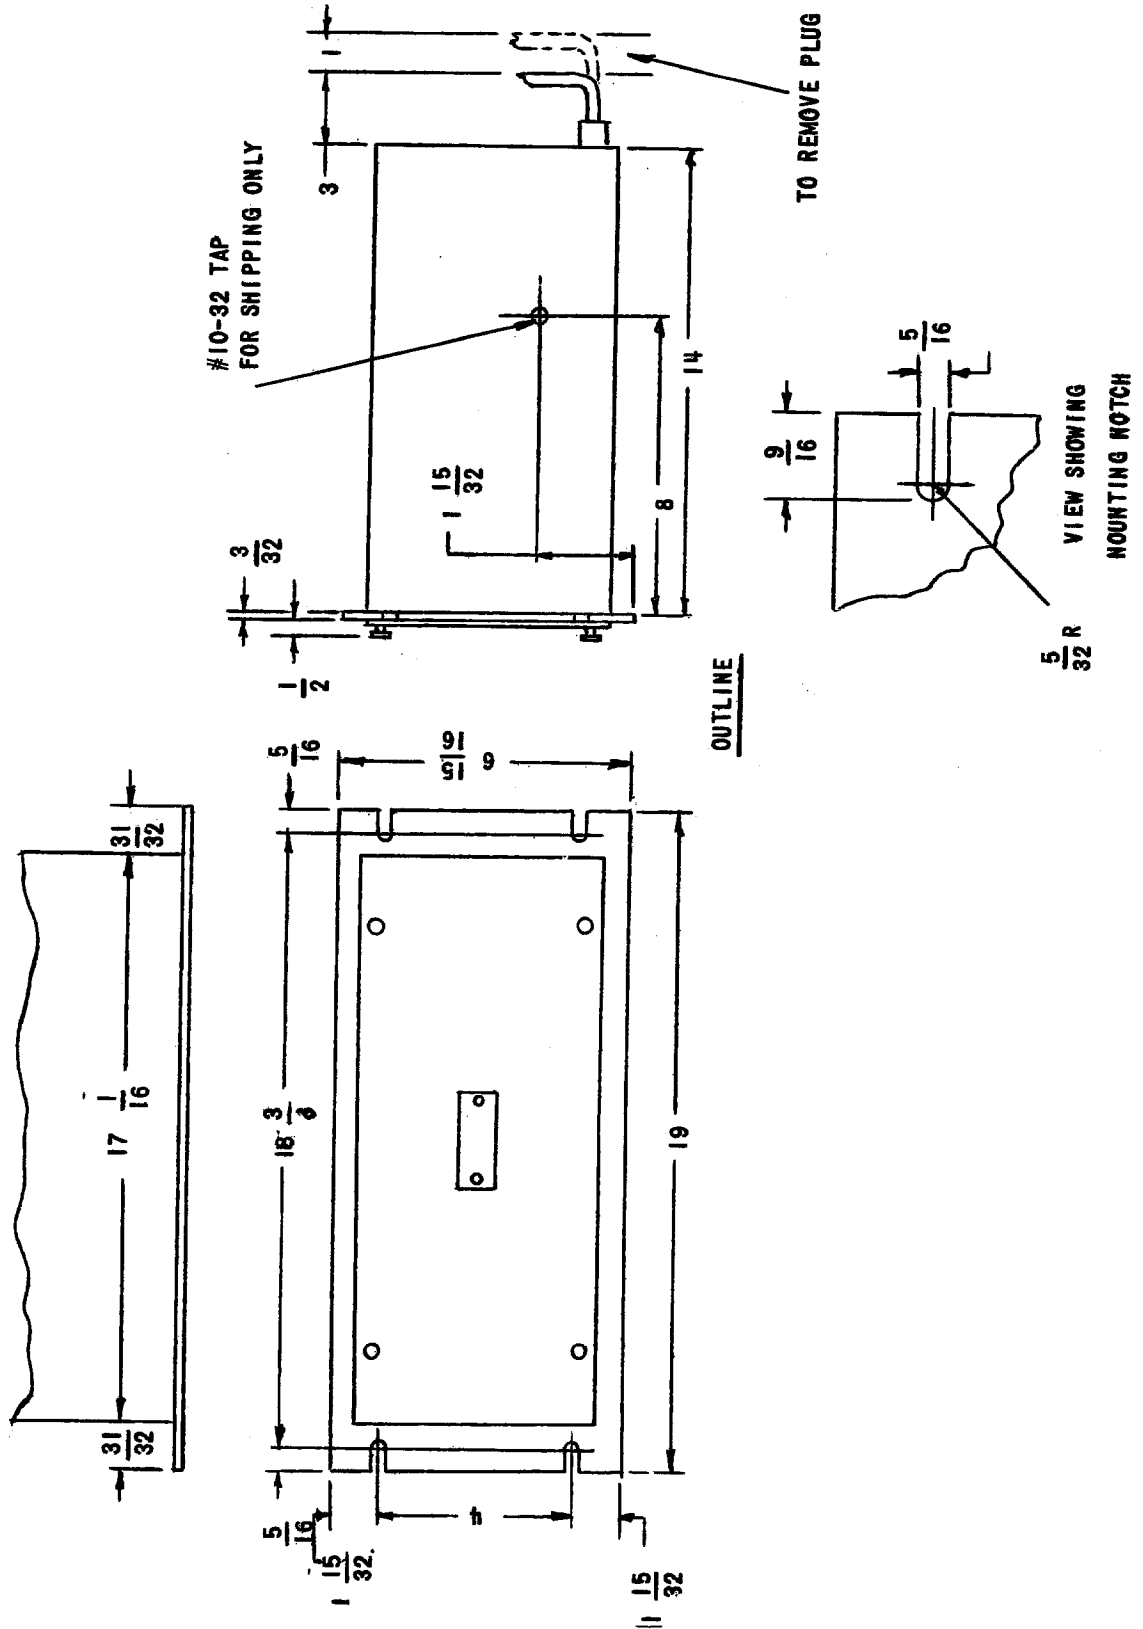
(0165A7662-3) OUTLINE AND MOUNTING DIMENSIONS FOR THE SLA12T RELAY
